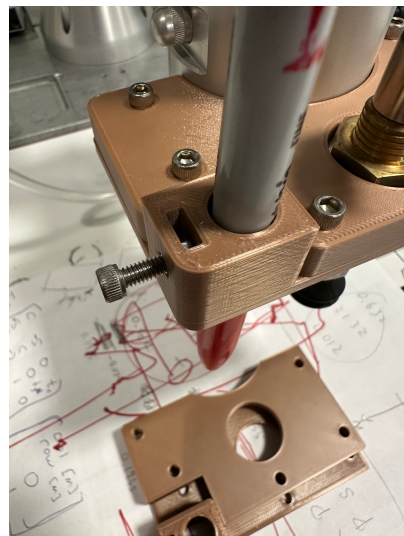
Final Utensil Holder Mounted (Initial Prototype Below)
